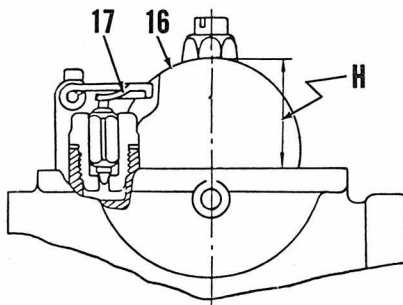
Float level (H) is adjusted by bending tang (17). Float bowl gasket should be removed when checking.
